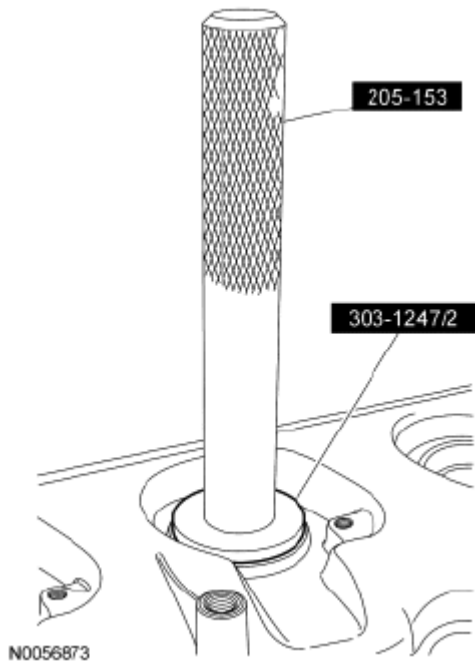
Identifying VCT Spark Plug Tube Seal Installer And Handle
